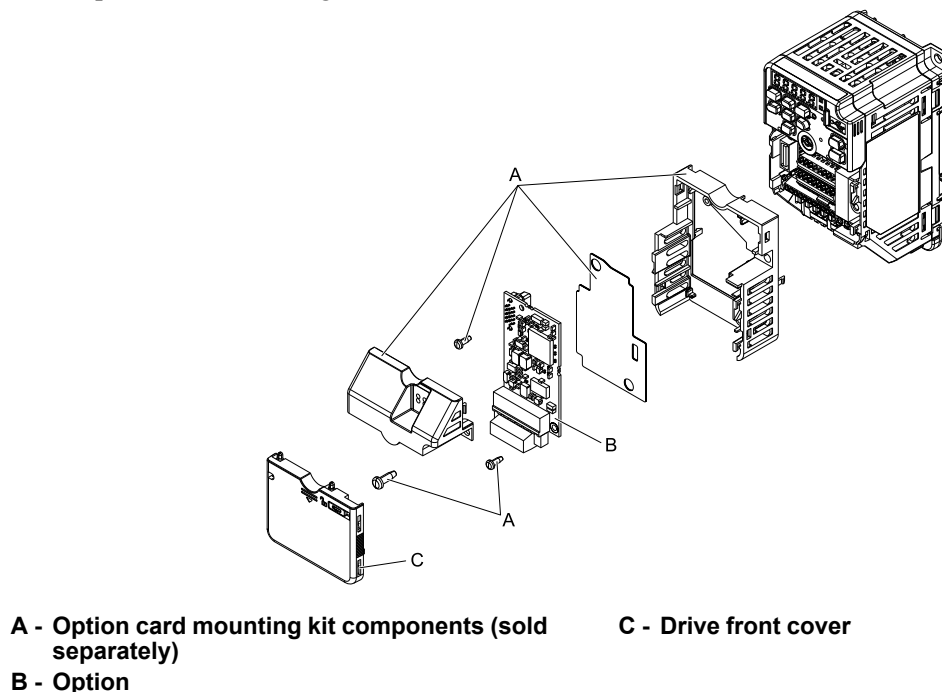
Option Card Mounting Kit (JOHB-GA50)
